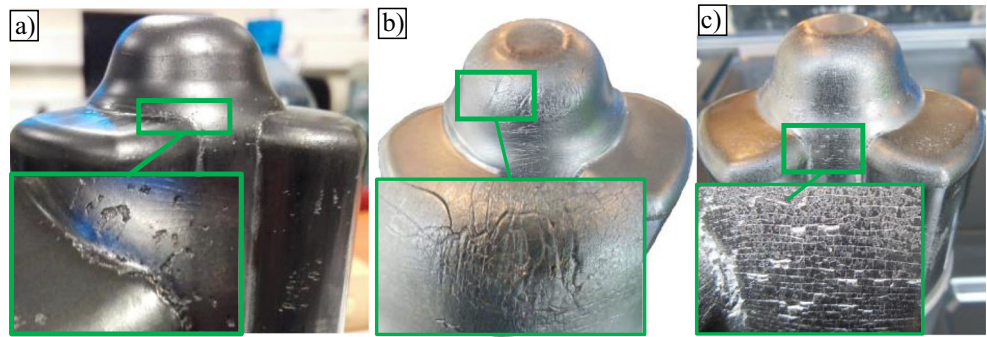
Macro-view of the tools. a A punch nitrided with a high potential after producing 1412 forgings, b with a hybrid layer PN + AlCrTiN after producing 1850 forgings, c with a hybrid layer PN + CrN after producing 2000 forgings
